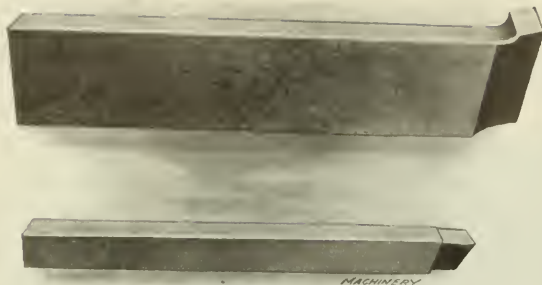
Ready Tools with Stellite Cutters arc- and butt-welded to Machine Steel Shanks
